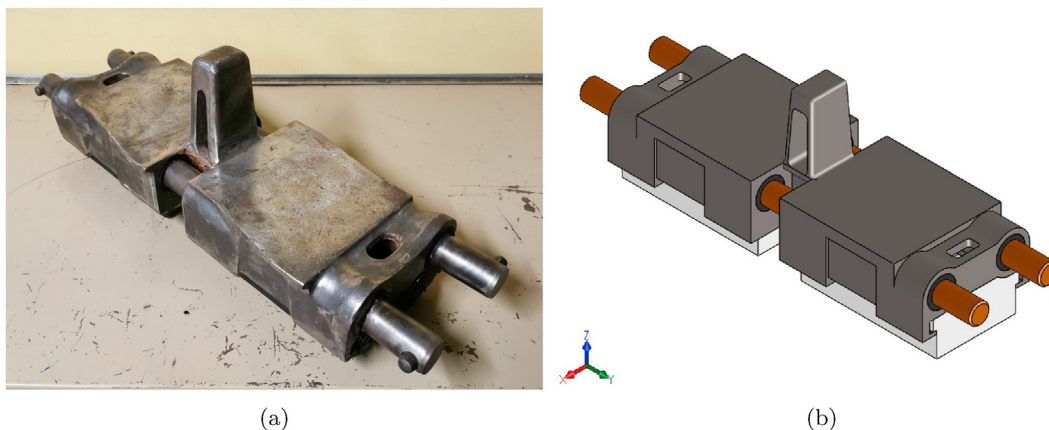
Track assembly geometry: real component (a) and CAD model (b).
